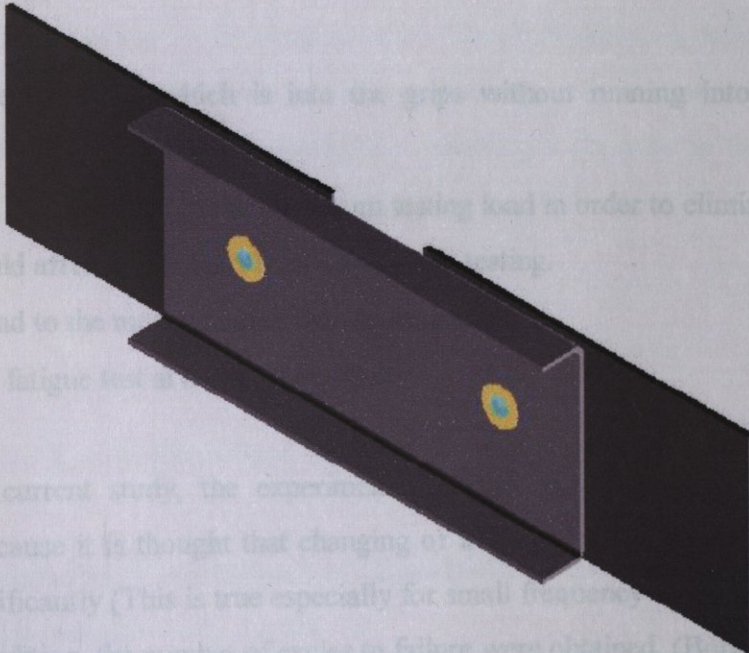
Three-dimensional appearance of MTS (modified tensile shear specimen)
